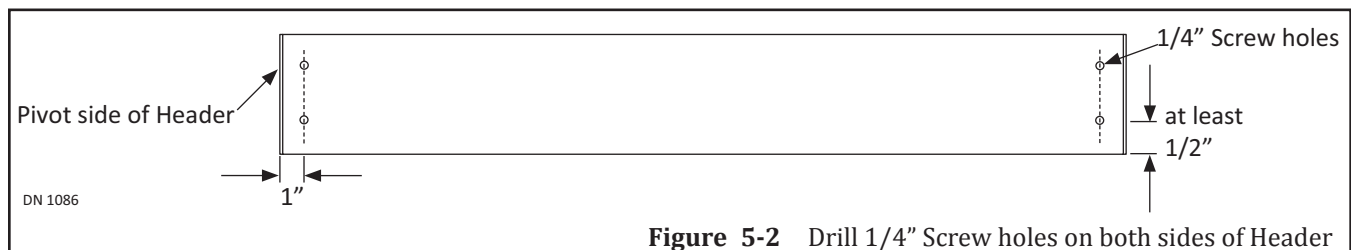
Drill 1/4" Screw holes on both sides of Header
